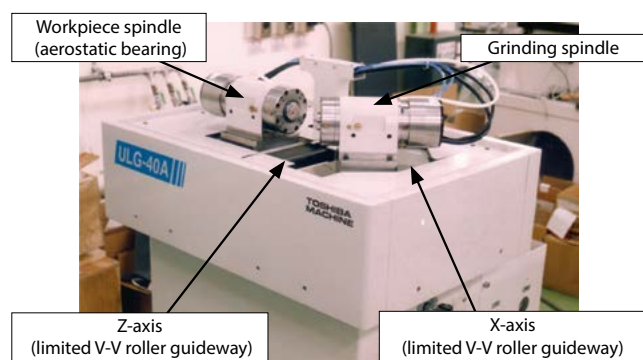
Ultra-precision aspheric machine tool for parallel grinding of aspheric lens molds
